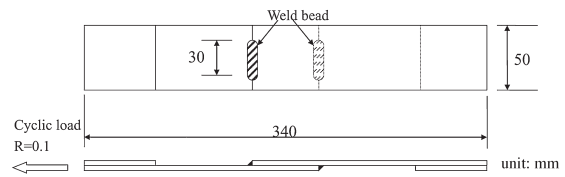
Schematic representation of arc-welded lap joints with weld start and end point
